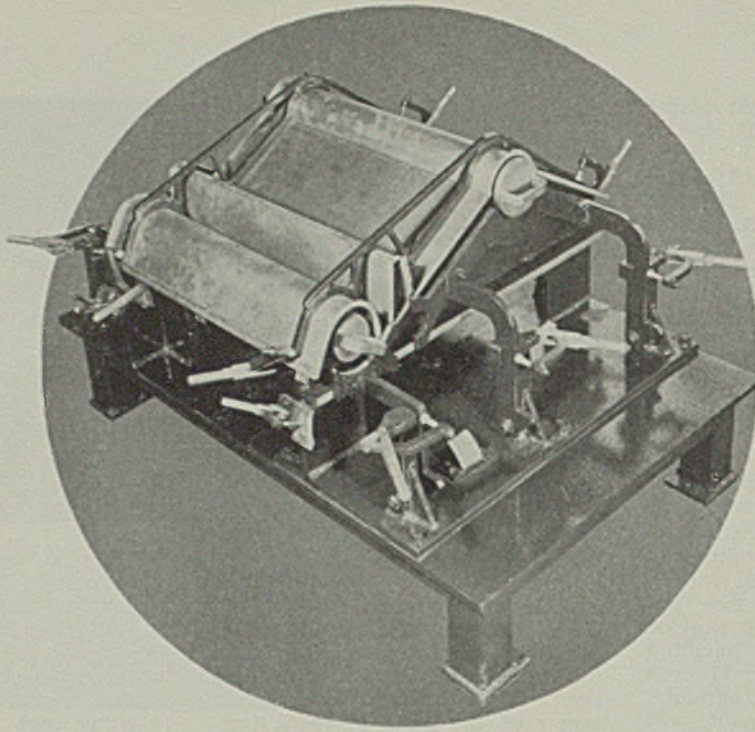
Auger housings are welded to lower side panel subassembly in this fixture
